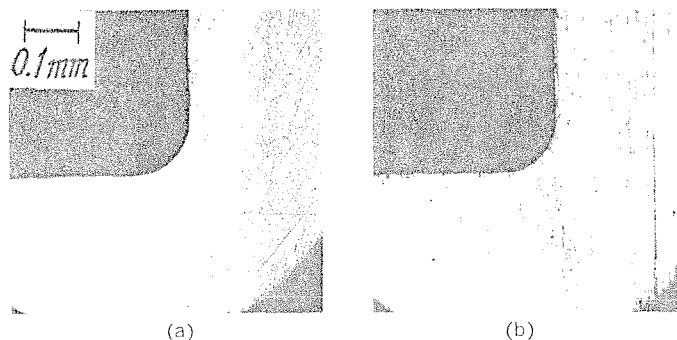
Radius of curvature at the corner of keyway.  $D = 11.9$  mm,  $r = 0.10$  mm. (a) Before cutting; (b) after cutting
